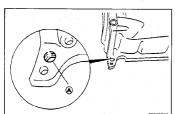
Install a bolt in the threaded hole to force the oil pan from the engine block—3.5L engine
